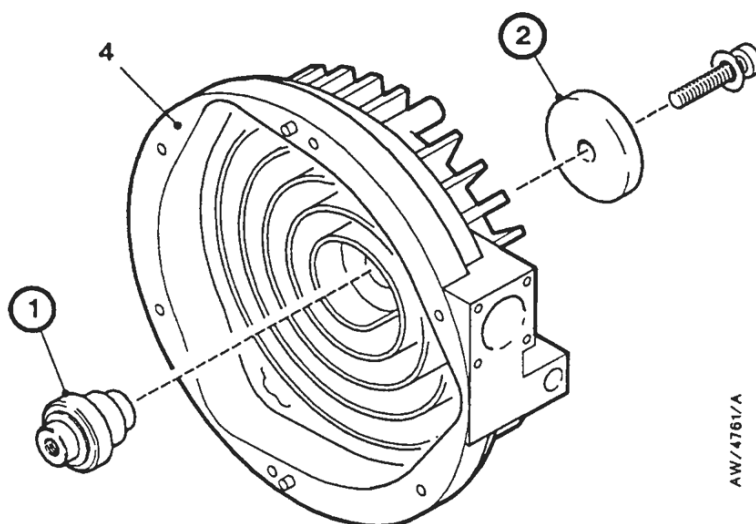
Fit the New Shaft Seal to the ESDP30/30A
